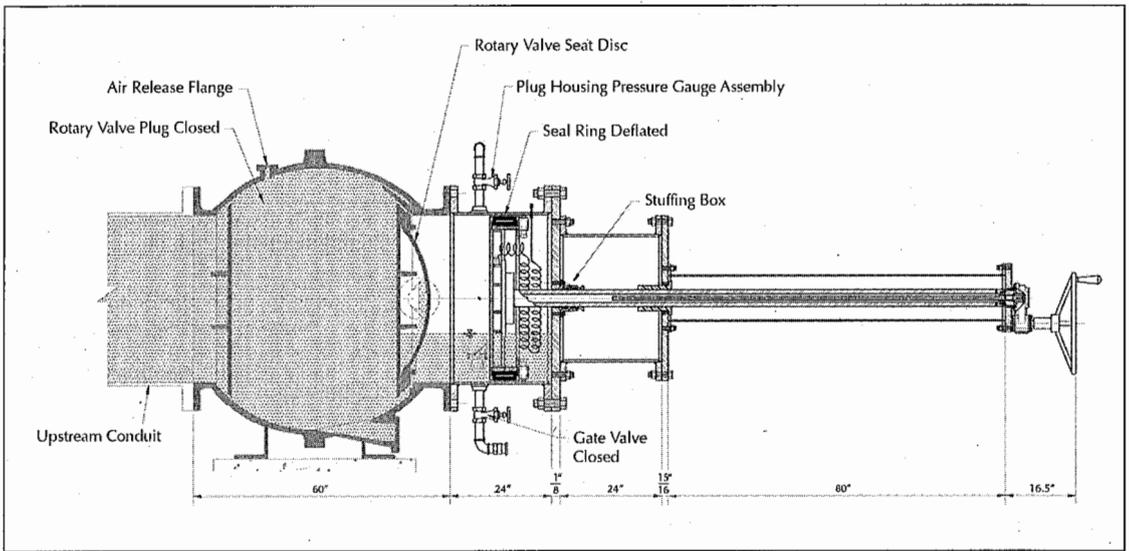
The device would have a cylindrical housing that would retain the plug mounted on a shaft.
